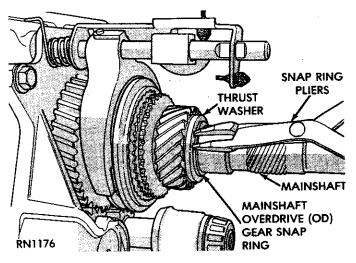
Removing/Installing Mainshaft OD Gear Snap Ring
